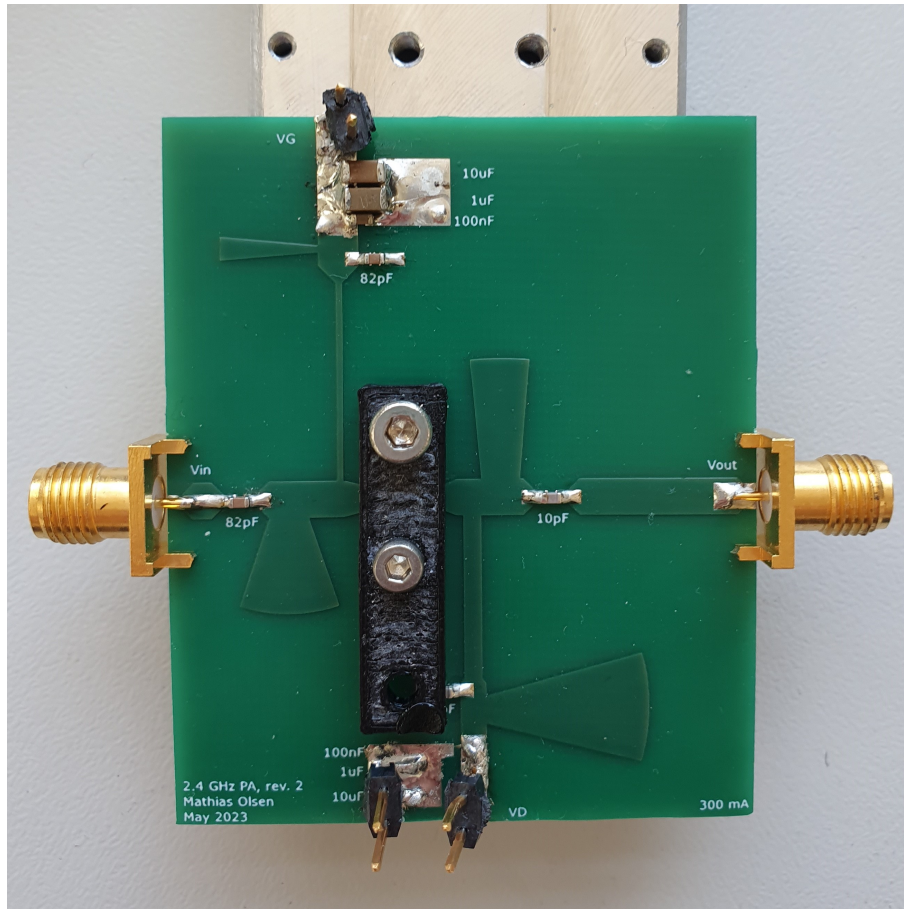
The final rev. 2, 300 mA PCB.
